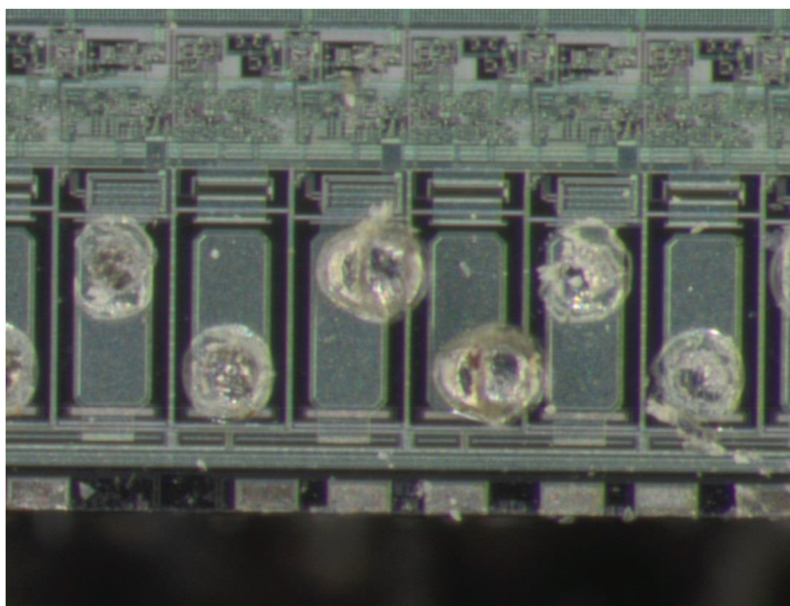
Magnified optical image of complete solder joint failure, residue from solder ball found on connection pad of the die.
